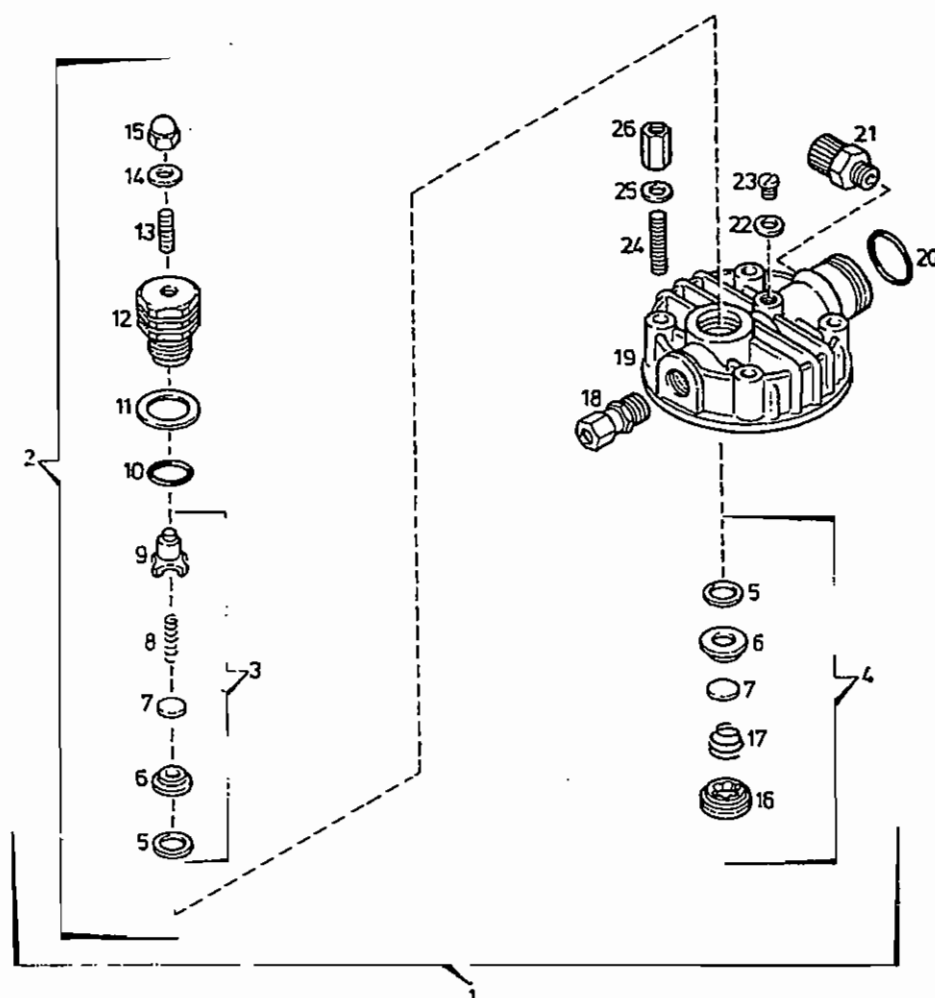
Valve head and valves, 1st stage KU-FH
